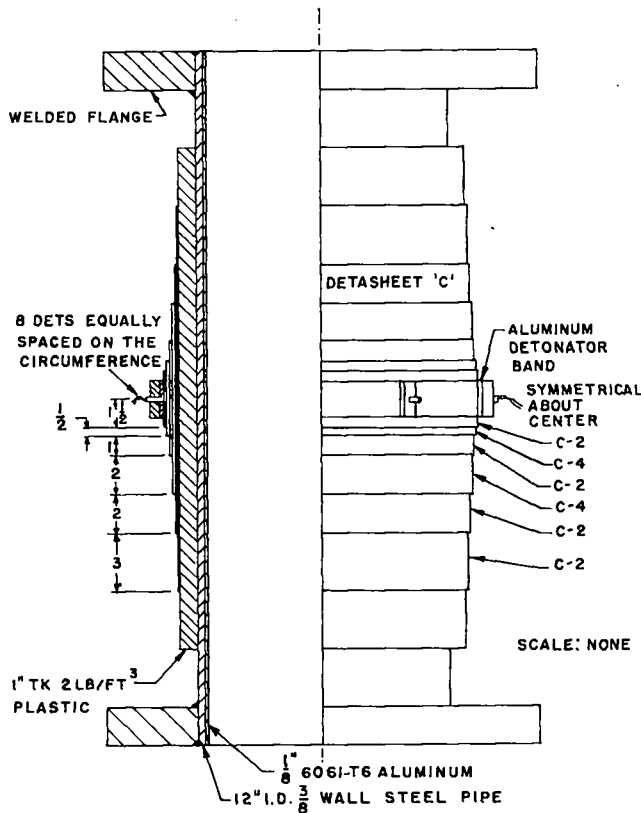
A 12-in. -diam steel pipe closure assembly. The heavy welded steel end-flanges prevent the pipe ends from collapsing when subjected to the buildup of high pressure HE gases in confined places. A 16-2/10-lb DuPont Detasheet explosive charge is initiated at eight places on the circumference midway between top and bottom.
